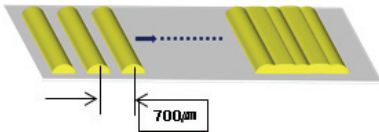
Schematic drawing of surface fabrication using nozzle dispensing^[4].
